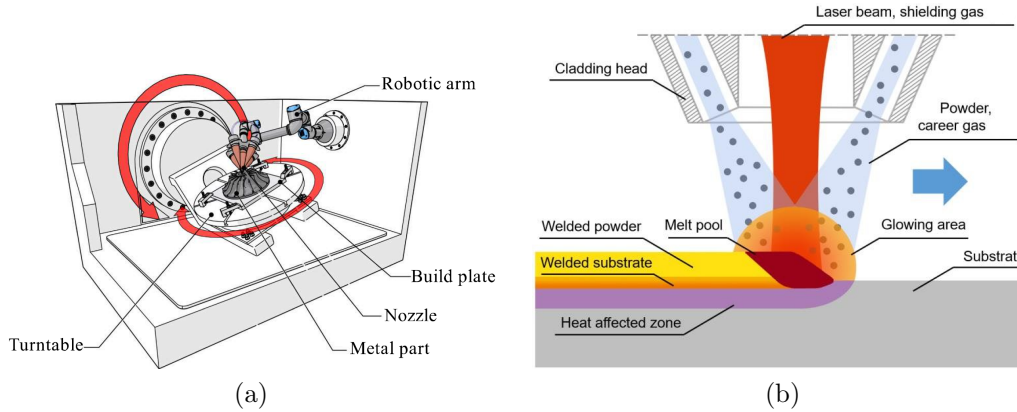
(a) General schematics of a LDED machine using powder feedstock [35], (b) Powder melting schematics showing the melt pool, the welding area and HAZ [42].
